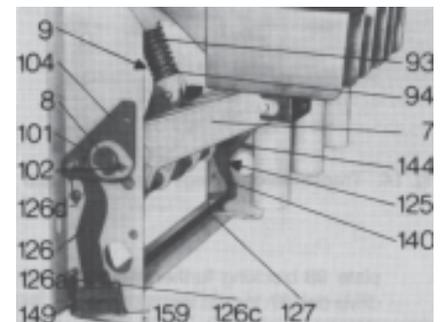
Switch mechanism with tripping device, type CR3, 10/12 kV in closed position, spring mechanism charged for tripping.
